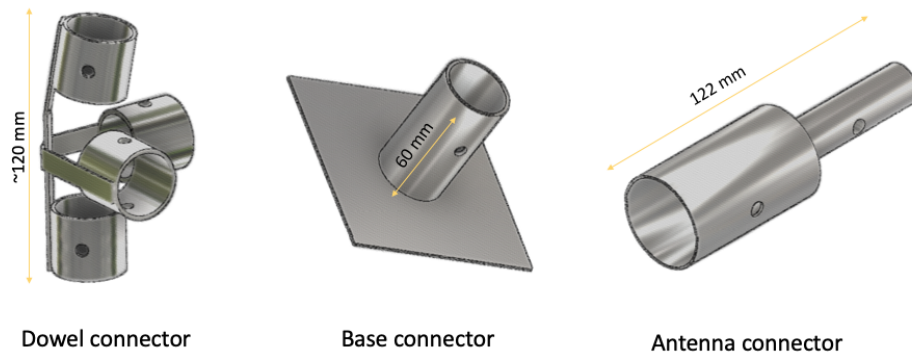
Three-dimensional technical drawing of the connectors used in the mount v1
